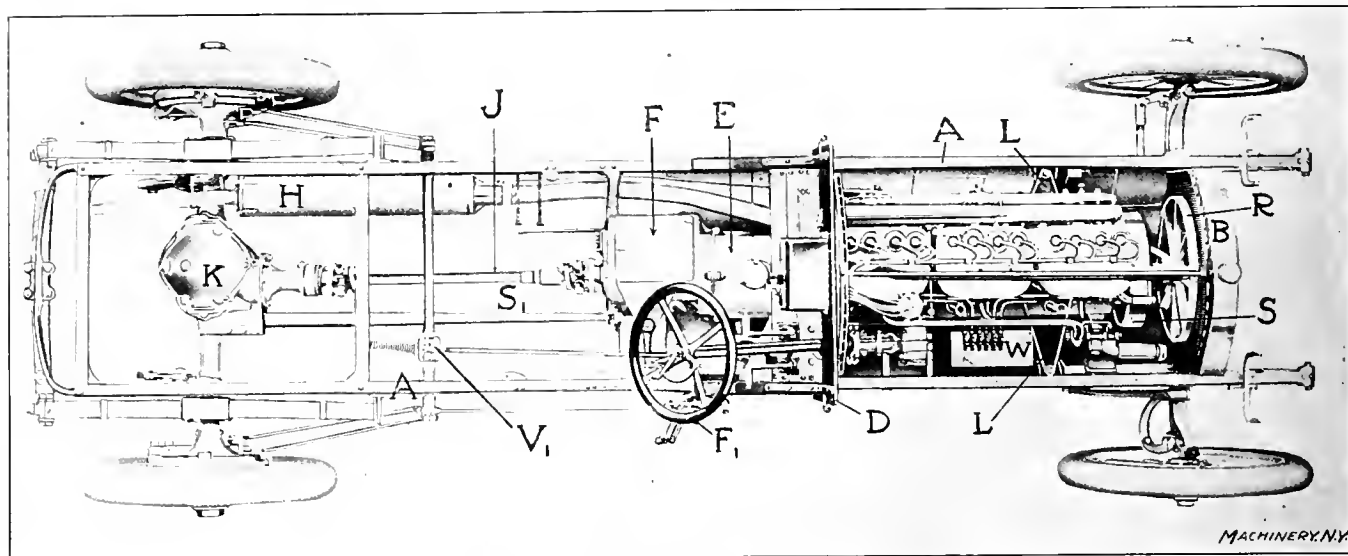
Top View of Chassis, showing Arrangement of the Mechanism
